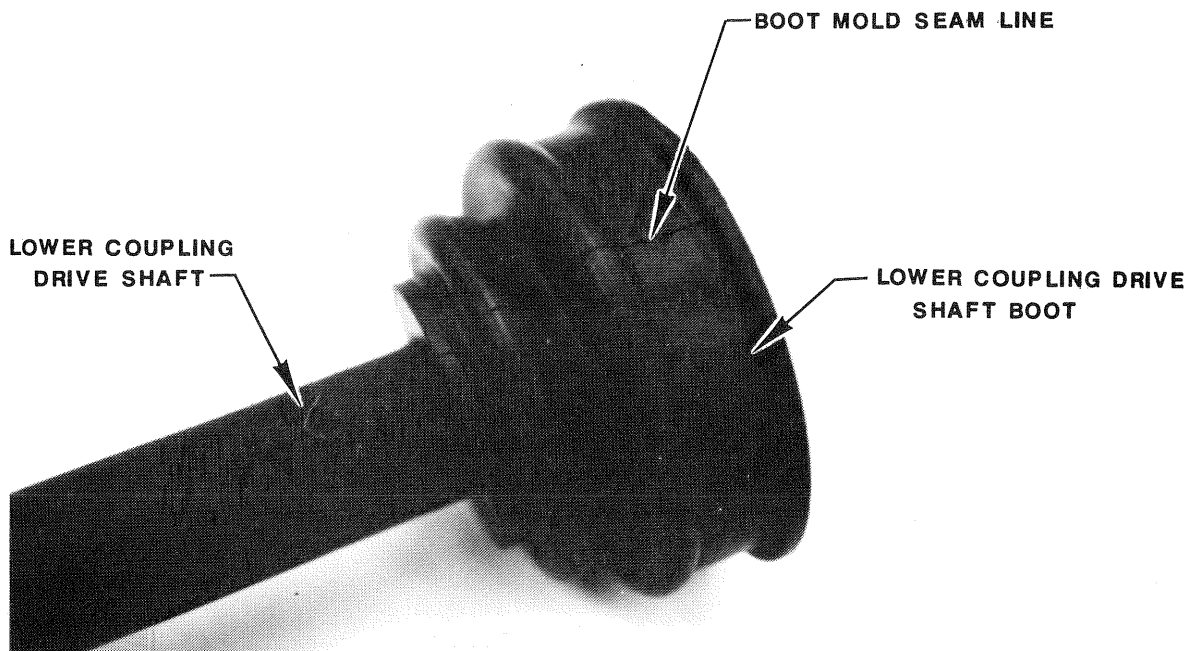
LOWER COUPLING SHAFT INSTALLATION
